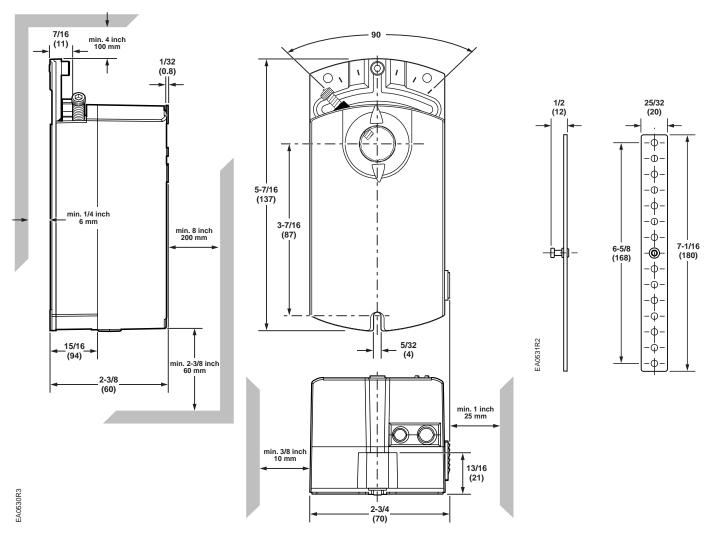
Dimensions of the GDE/GLB Actuator and Mounting Bracket.
